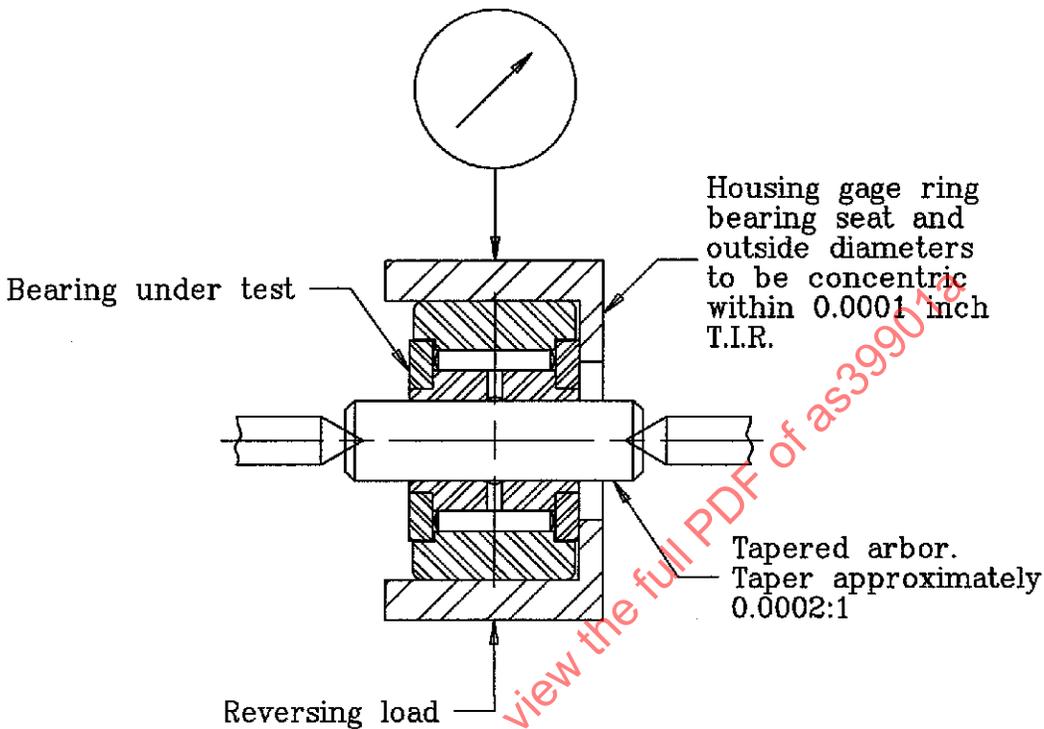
A - Radial Internal Clearance and Radial Runout Test for Type I Bearings
